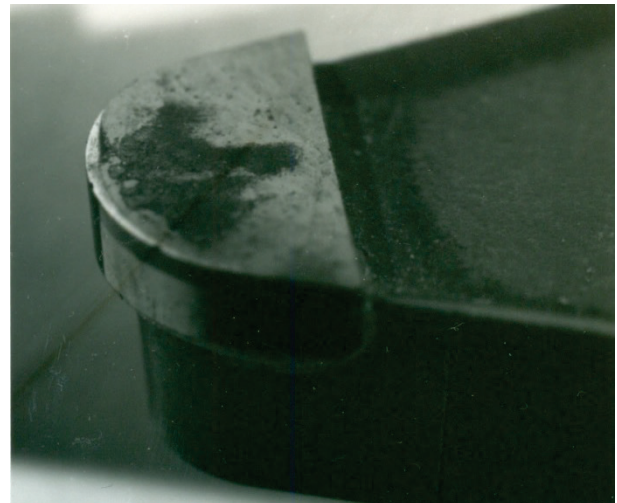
PCD tool insert after cutting for 30 min showing material layer on rake face of tool
